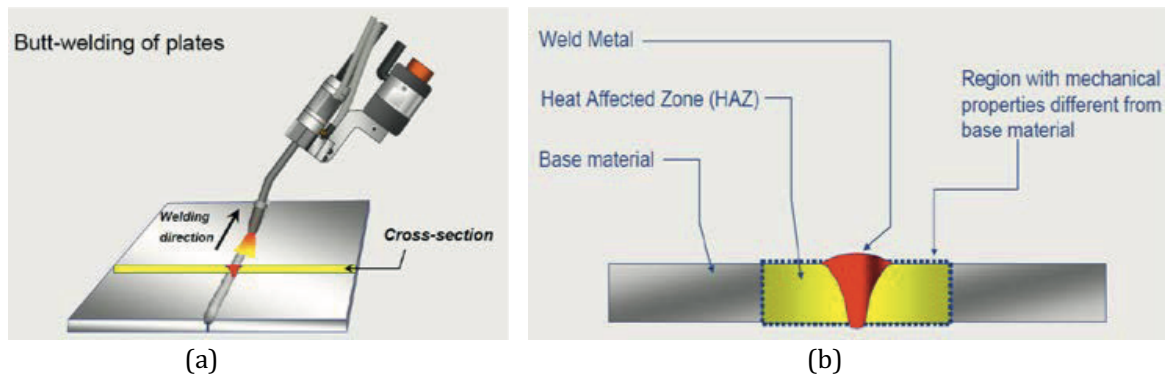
MIG welding of aluminium (a) butt-welded plates and (b) the Heat Affected Zones (HAZ) [29].
